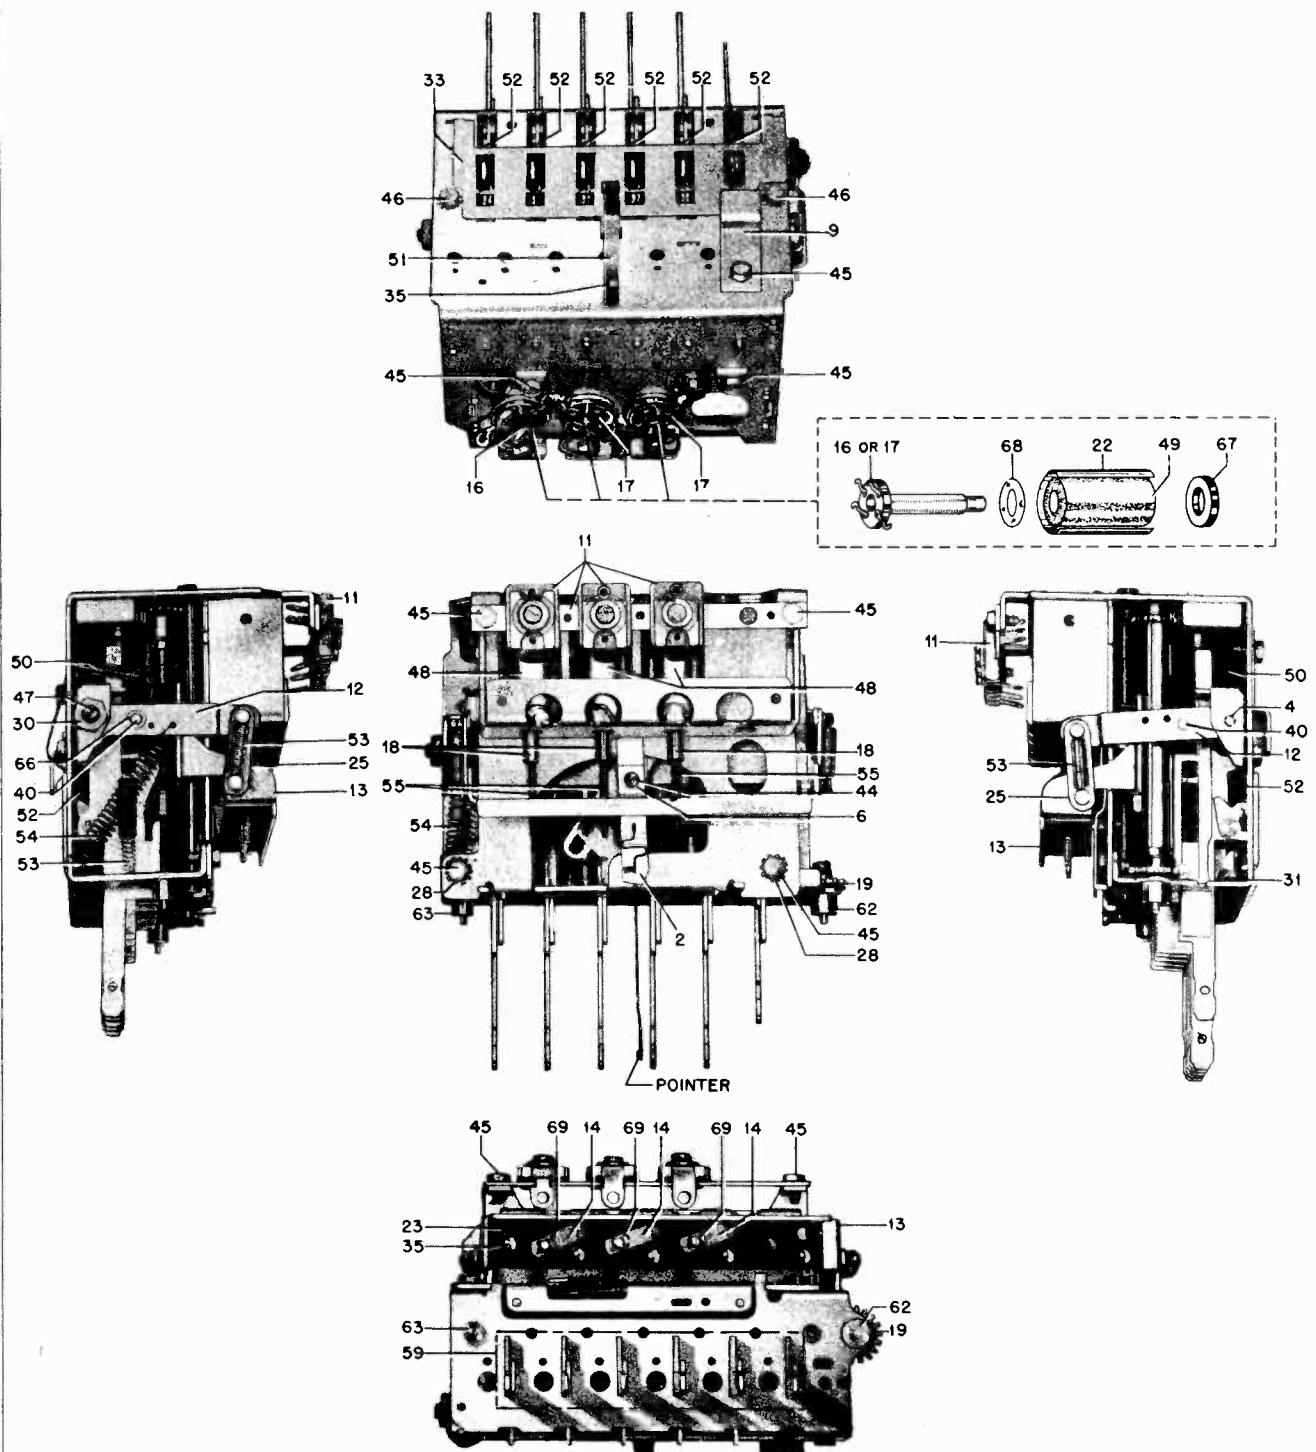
AUTOMATIC TUNER AT-58 PARTS LOCATIONS
